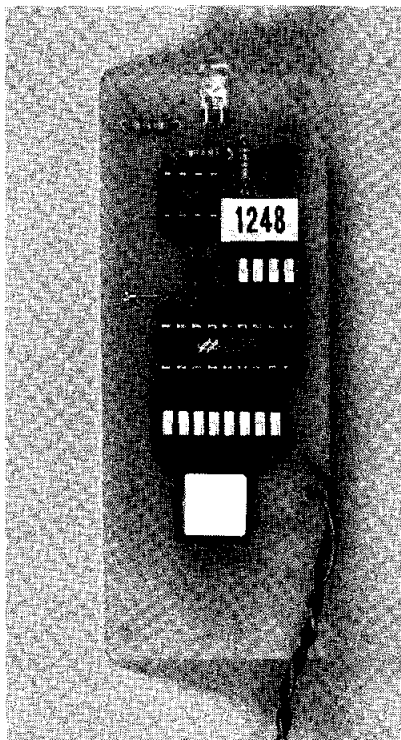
COMPLETED TRANSMITTER BOARD. This board allows unique coding that won't interfere with nearby remote-controlled equipment.
